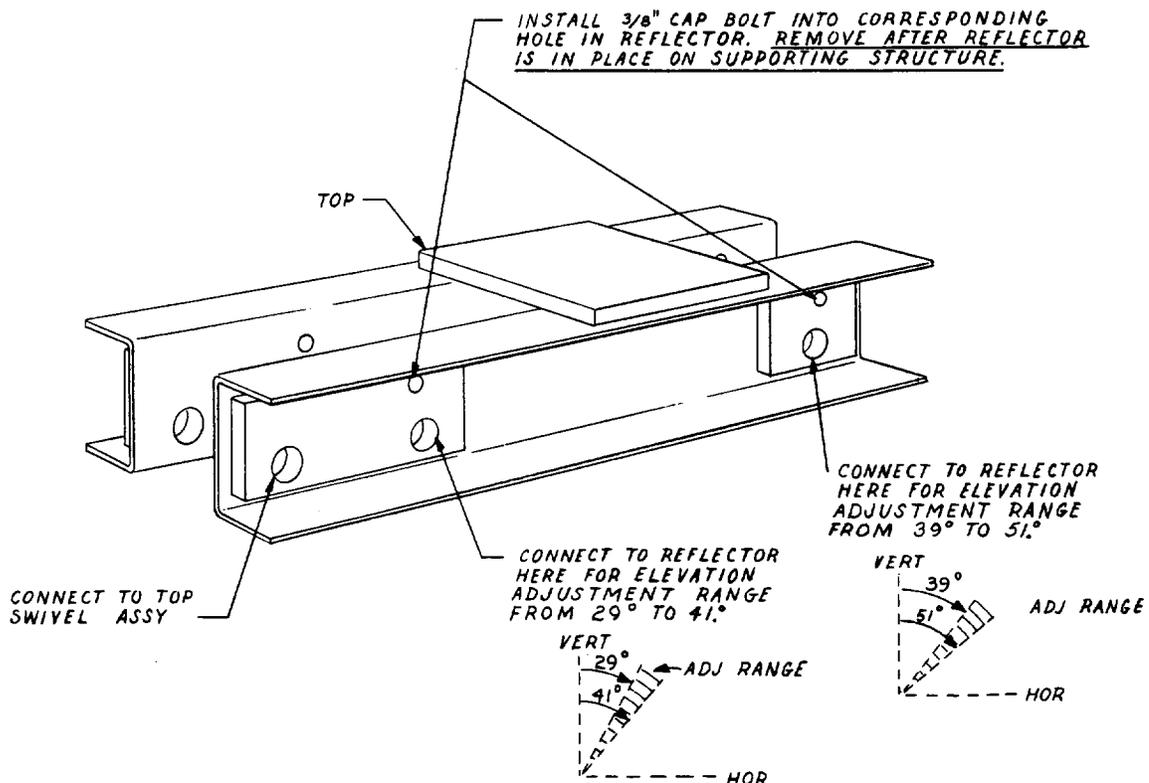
Top Mount Assembly — KS-16320 Passive Reflector
